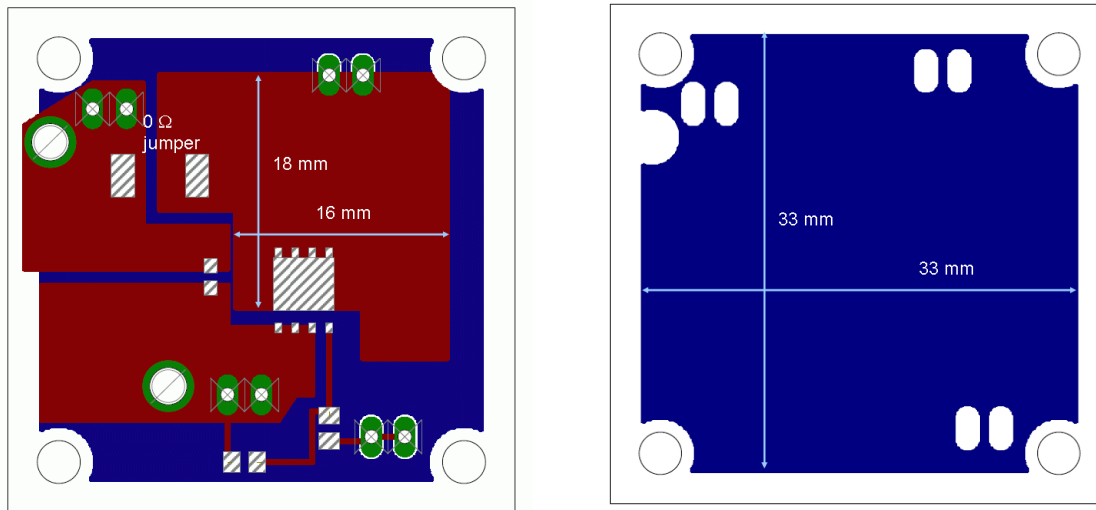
Test Board Layout (DFN5x6 shown, 18 mm x 16 mm Top copper plane, 33 x 33 mm bottom copper plane. The board outline is 38 mm x 38 mm.
